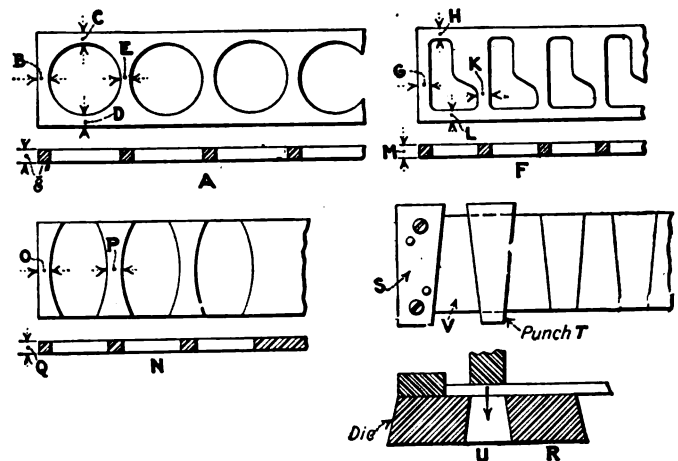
POSITION OF PUNCH IN BLANKING OPERATIONS
